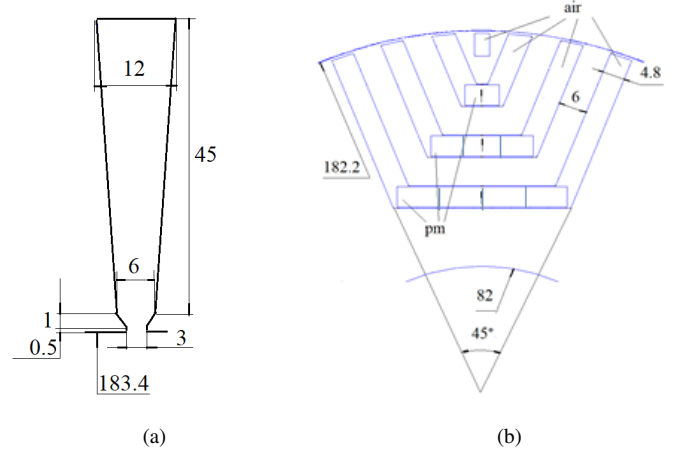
Main dimensions of the designed SynRM, illustrating (a) the stator slot geometry and (b) the rotor pole geometry.
